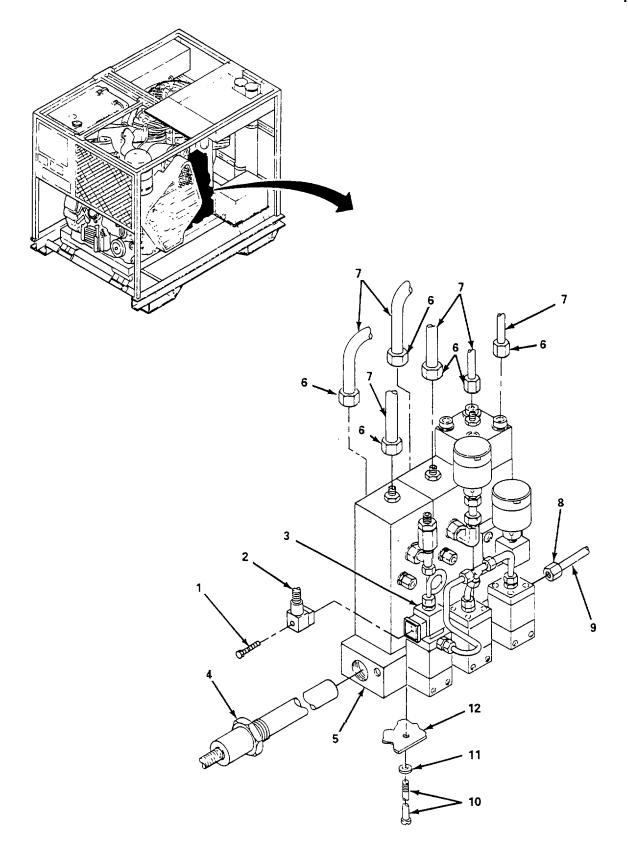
Interfilter Heater Block Assembly, Replace.
